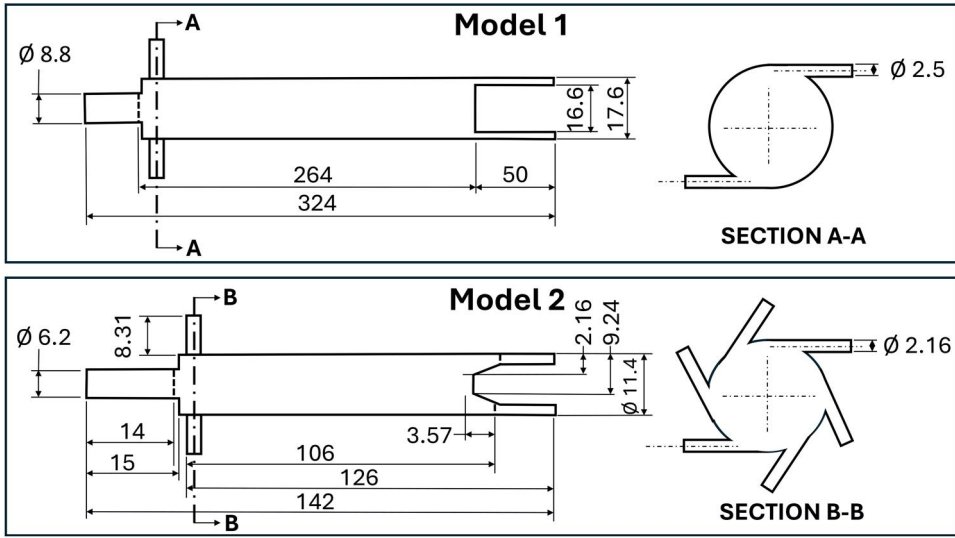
Dimensions of both RHVT models investigated in this study (all dimensions in mm).
